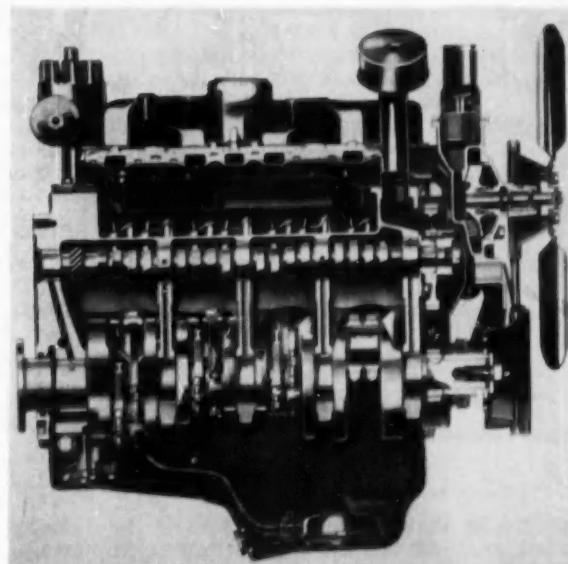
Longitudinal section of the Plymouth V-8. Crankshaft is only 25 in. long, weighs 50 lb.
